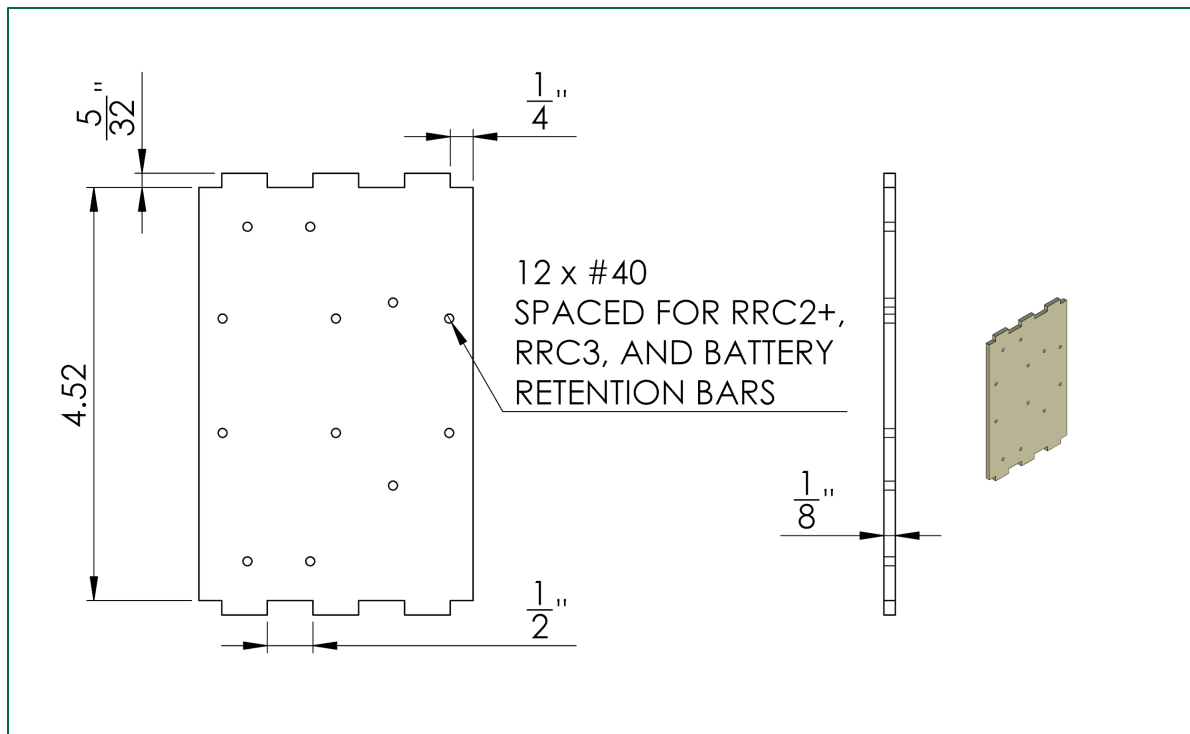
Avionics bay sled assembly side "A", with RRC3 and RRC2+ mounting holes.
